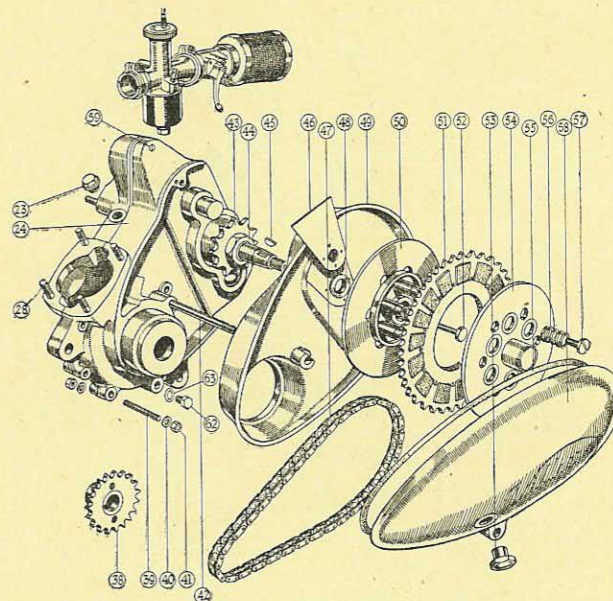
CRANKCASE AND CLUTCH ASSEMBLY.
